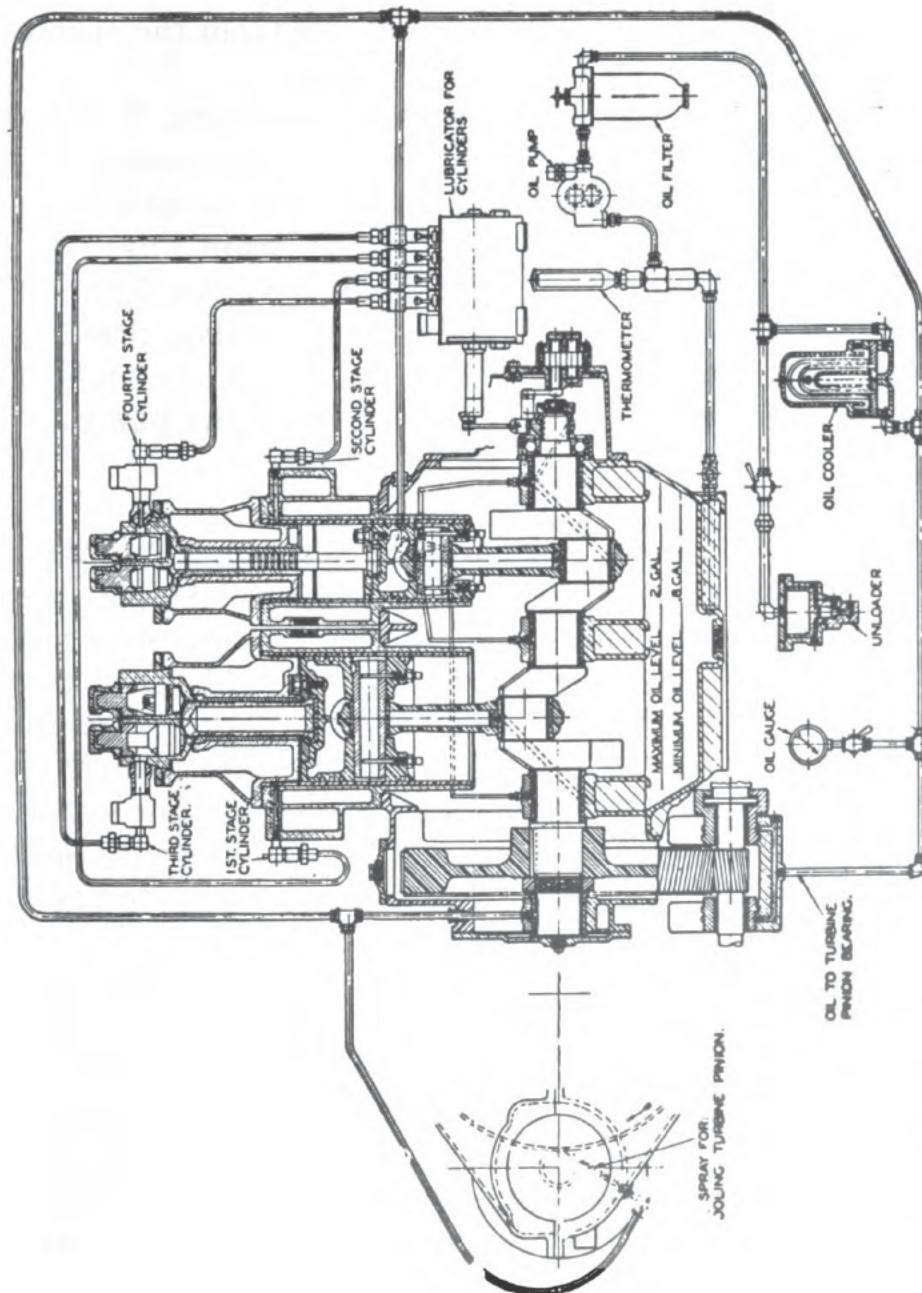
Lube oil system of a typical multistage turbine-driven high pressure air compressor.
